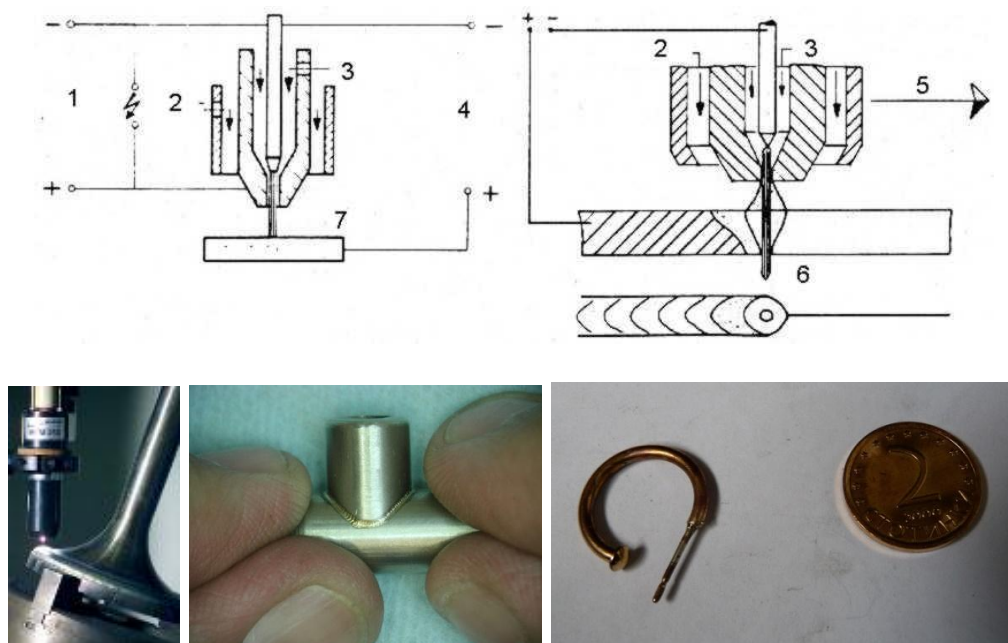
Principle of operation of plasma welding (piercing) and piercing welding. Details by plasma welding, micro plasma welding and brazing [14]
